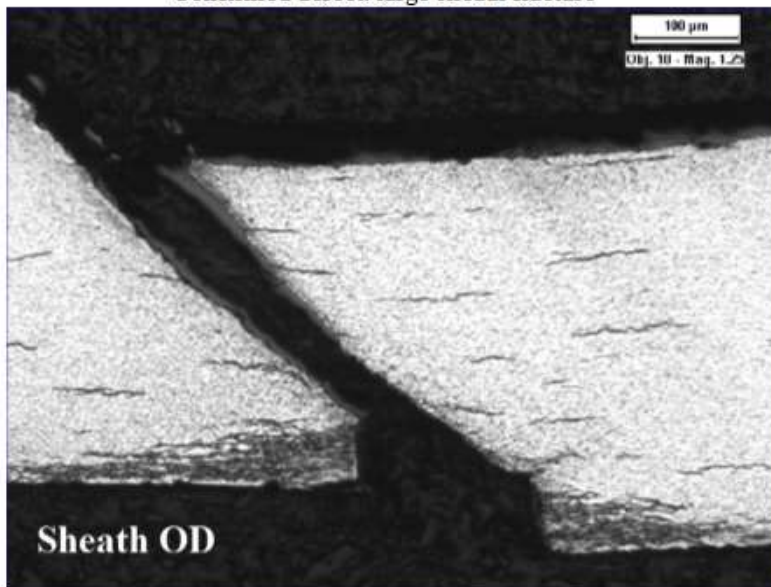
Confirmed primary defects (incomplete weld closures), elements 15, 06, and 18.
